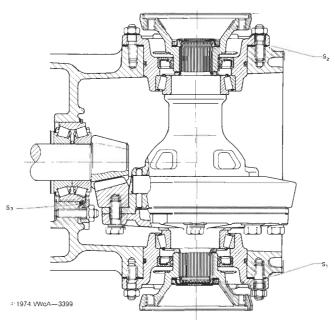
Early final drive adjustments. S_3 shim(s) control pinion position; S_1 shim(s) on ring gear side and S_2 shim(s) on opposite side control ring gear position.
